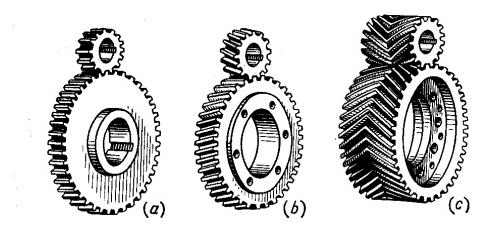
(a) Straight toothed (b)Helical and (c) Double helical gears
